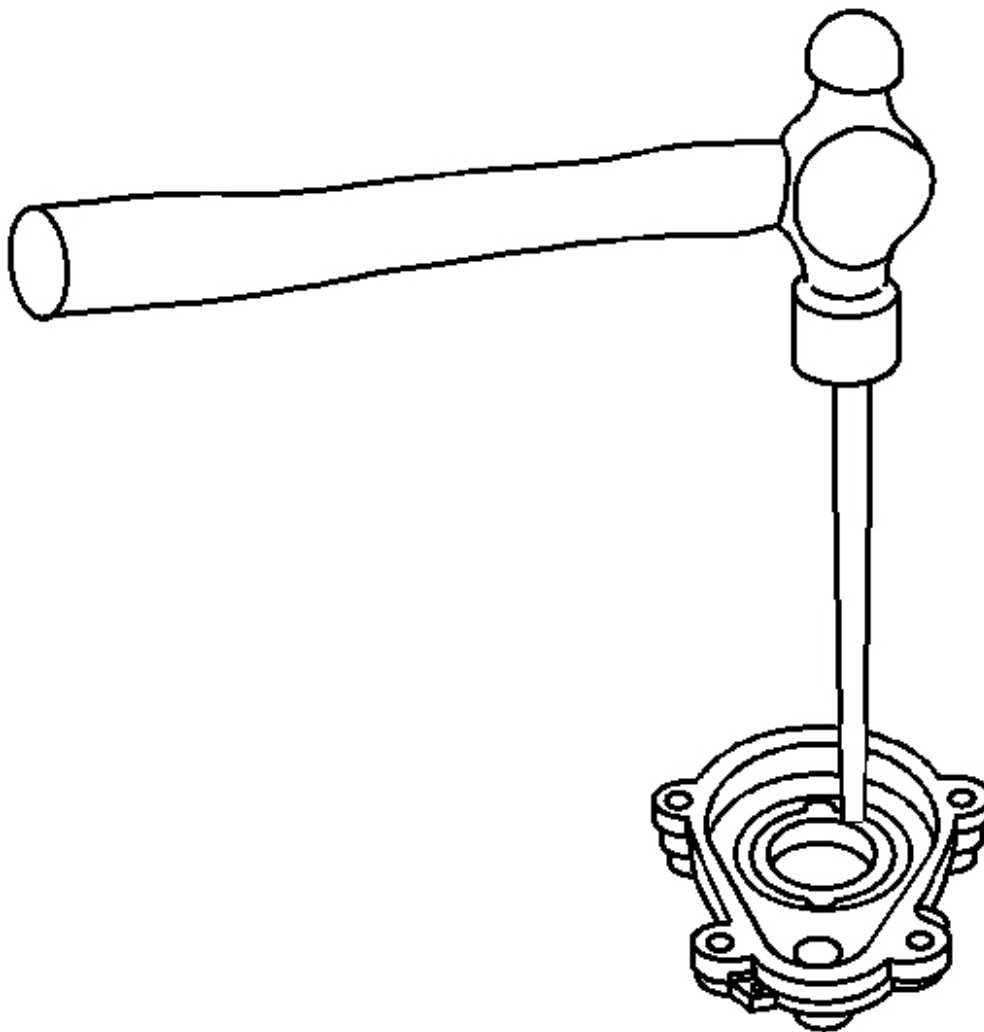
Removing Bearing From Inner Intermediate Shaft Bearing Case Half
